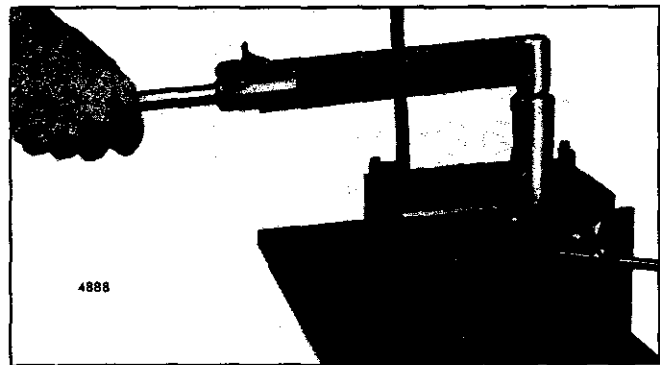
Tightening Injector Nut with Torque Wrench Using Tool J 4983-01
